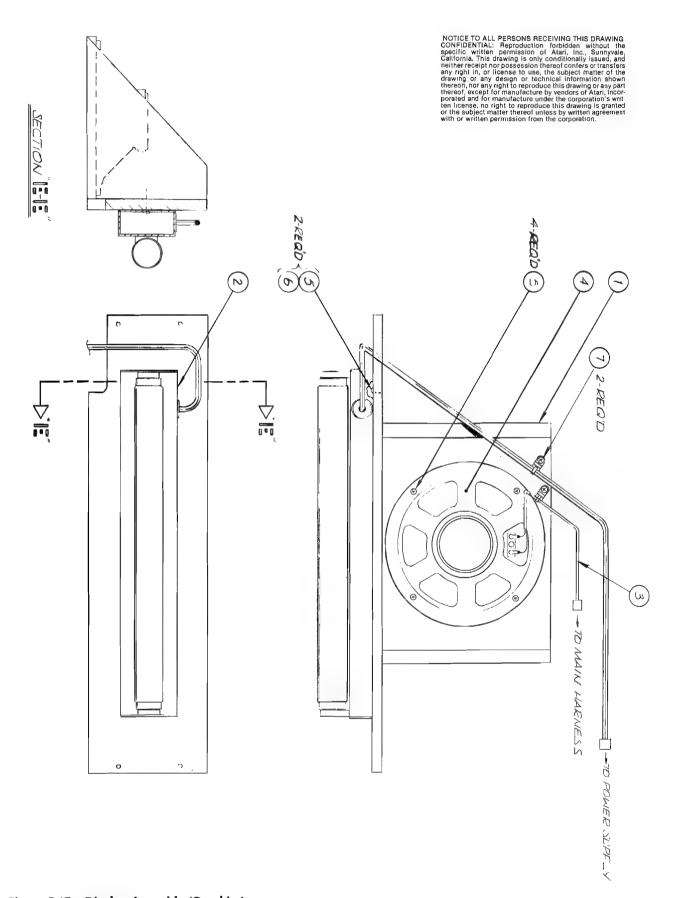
Display Assembly (Graphics) A032838-01 D
